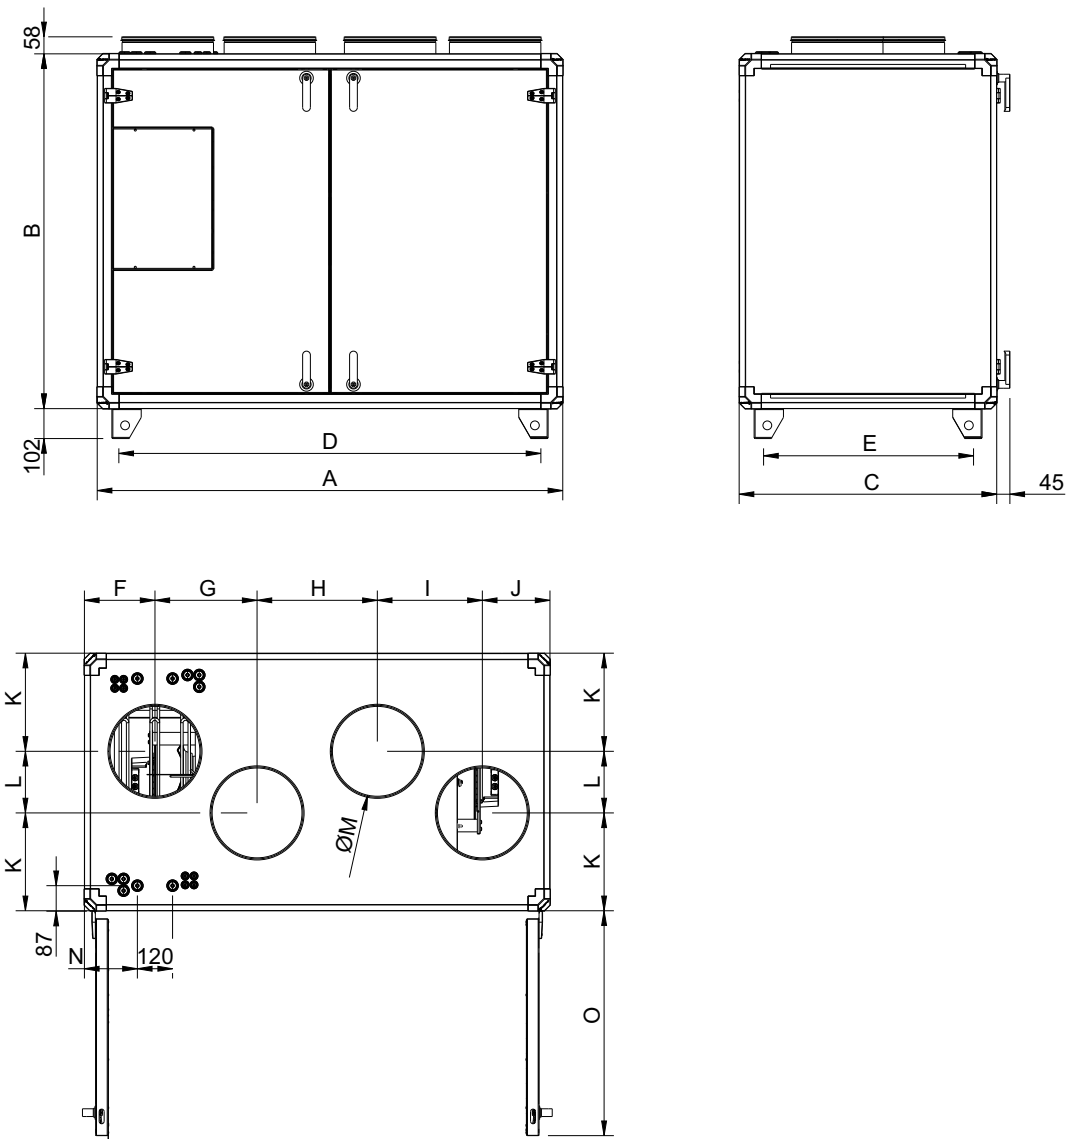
Dimensions (mm) Topvex SX/C03 (drawn as left hand unit)
